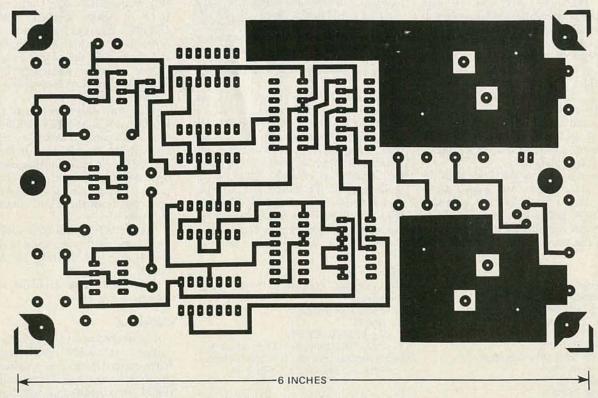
COMPONENT-SIDE foil pattern. Both sides of the board must be in perfect register. Holes should be plated-through.
